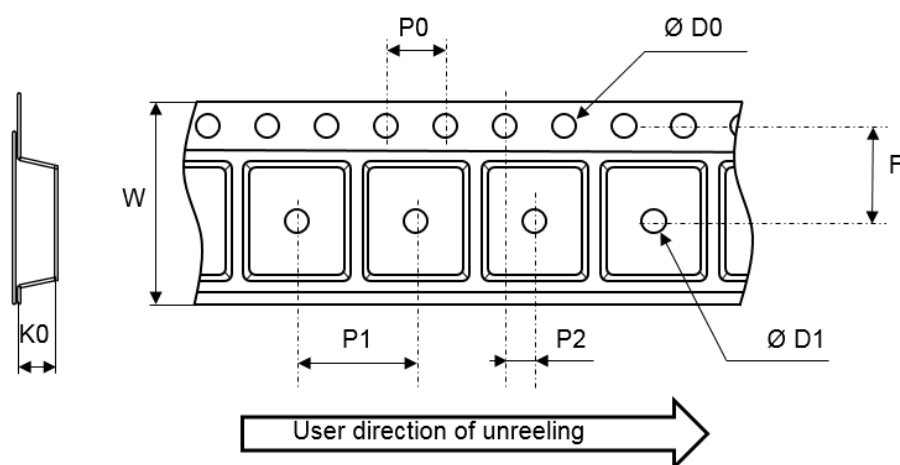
Tape and reel orientationFigure 16: 13" reel dimensions (mm)Figure 17: Inner box dimensions (mm)
